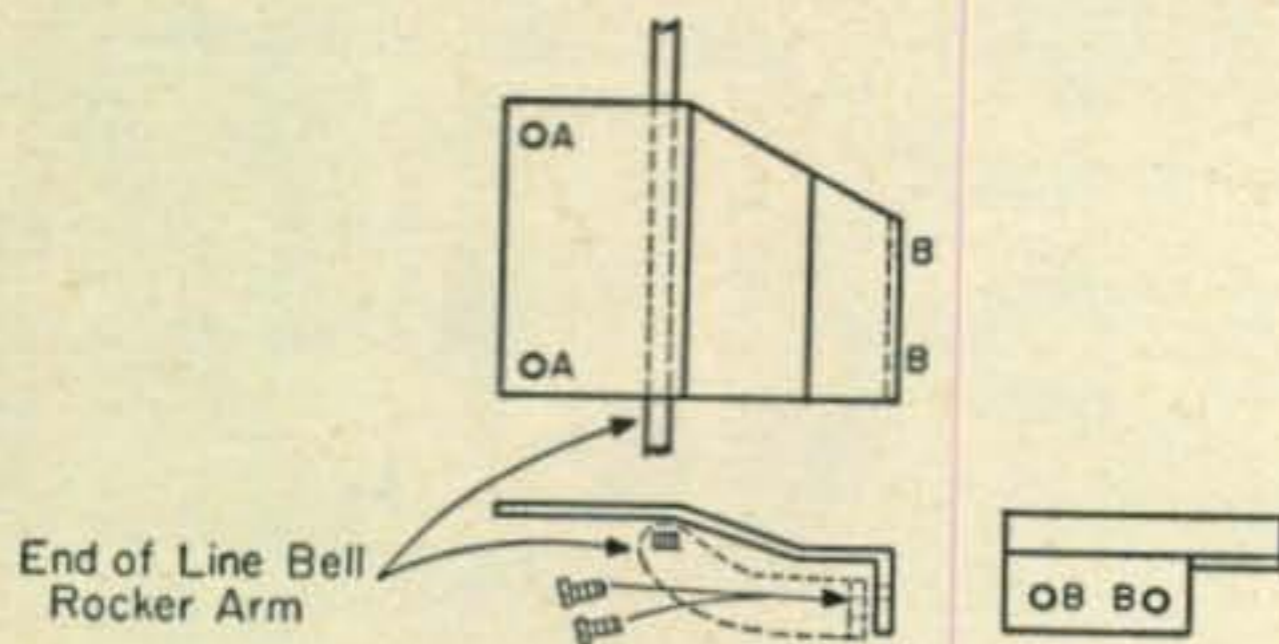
Construction details for the solenoid mounting bracket. The solenoid is mounted with only 2 screws (holes A). Note the slight bend shown in the side view. This is necessary to clear the "End of Line Bell Rocker Arm" beneath the bracket. Holes B are located so that the bracket may be held by the same screws that hold the rocker arm bracket.
